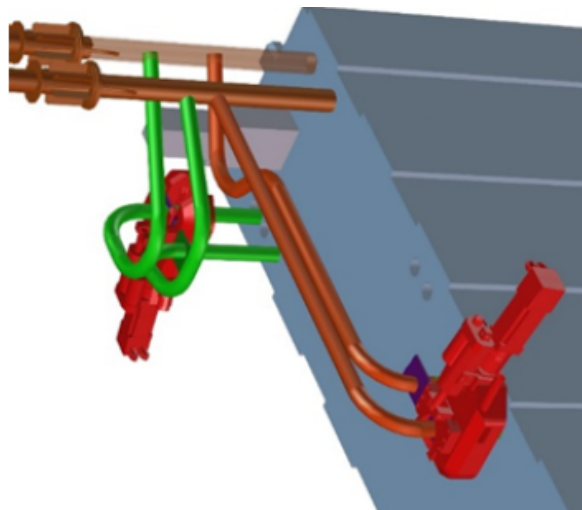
Pipe welding on the back of the diagnostic shield module by RH welding tool.
